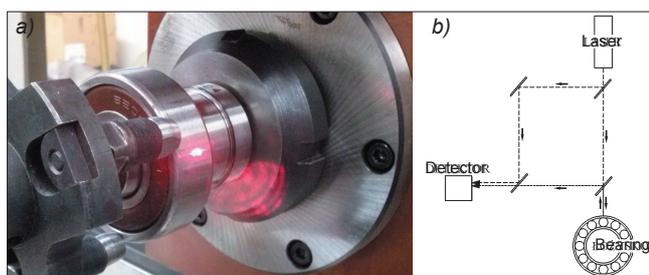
Contactless measurement of vibration speed with a laser vibrometer, the beam of which is visible on the outer ring of the rolling bearing (a), and the principle of measurement (b)
